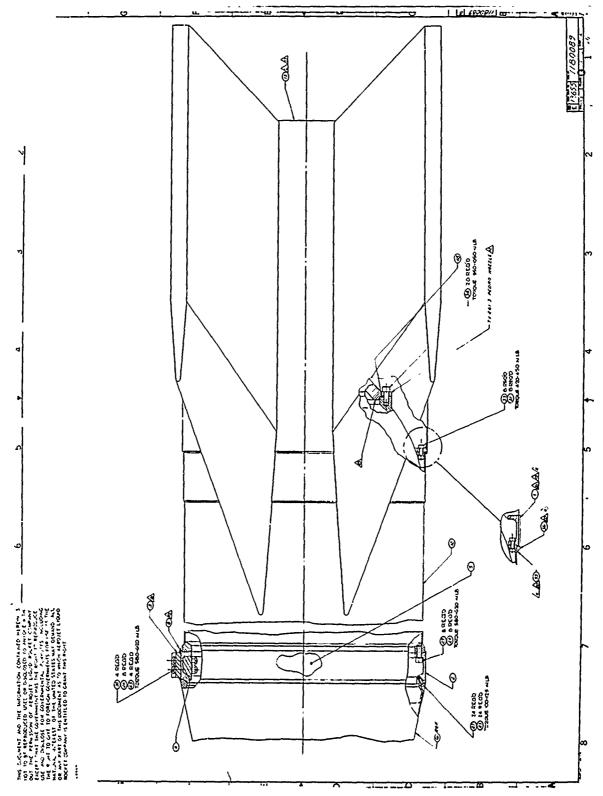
Main Assembly, FLAME - 1180089 (Sheet 4 of 4)
